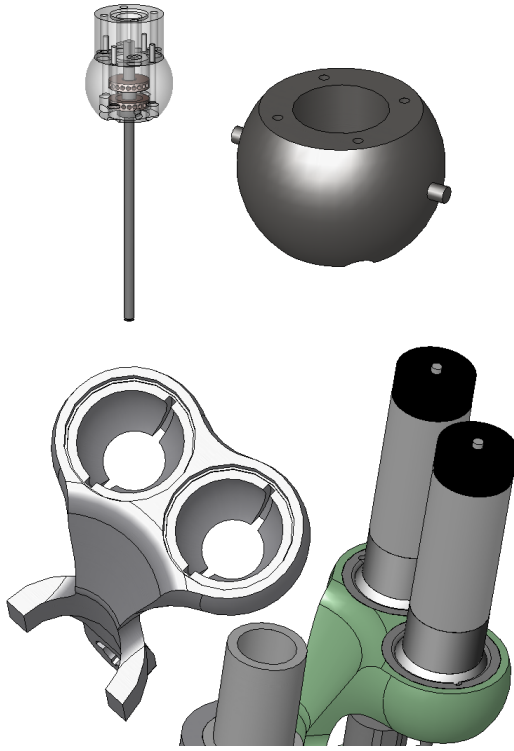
The ball pieces of the ball joint interface are shown, with the actuator subassembly shown in the upper left, individual ball mount shown in the upper right, socket arm shown in the lower left, and the fully assembled ball joint interface shown in the lower right. The restricted ball joint is equivalent to two intersecting, orthogonal, rotational joints.
